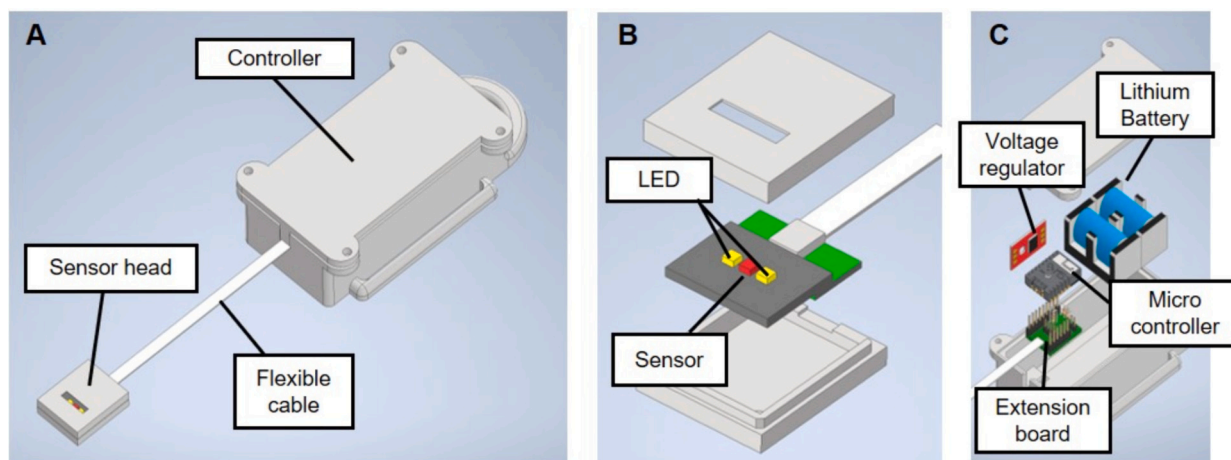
(A) Illustration of the measurement system consisting of a sensor head and a controller unit. Configuration of (B) the sensor head and (C) the controller.
